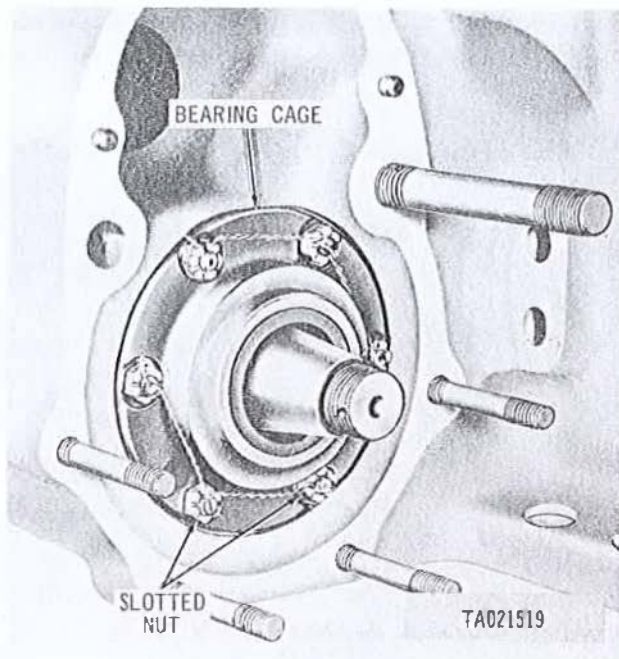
Removing or installing starter driven gearshaft bearing cage attaching parts.
